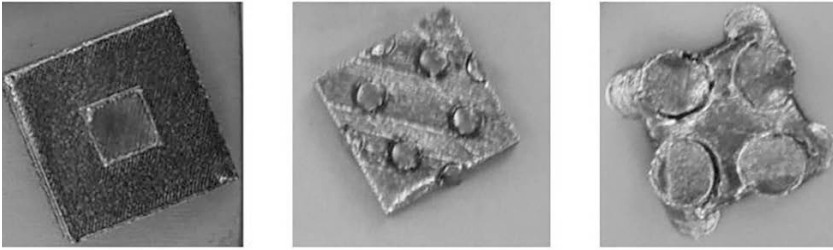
Multi-material structures with 1.2709 tool steel and copper alloy CuCr1Zr (Fraunhofer IGCV)
